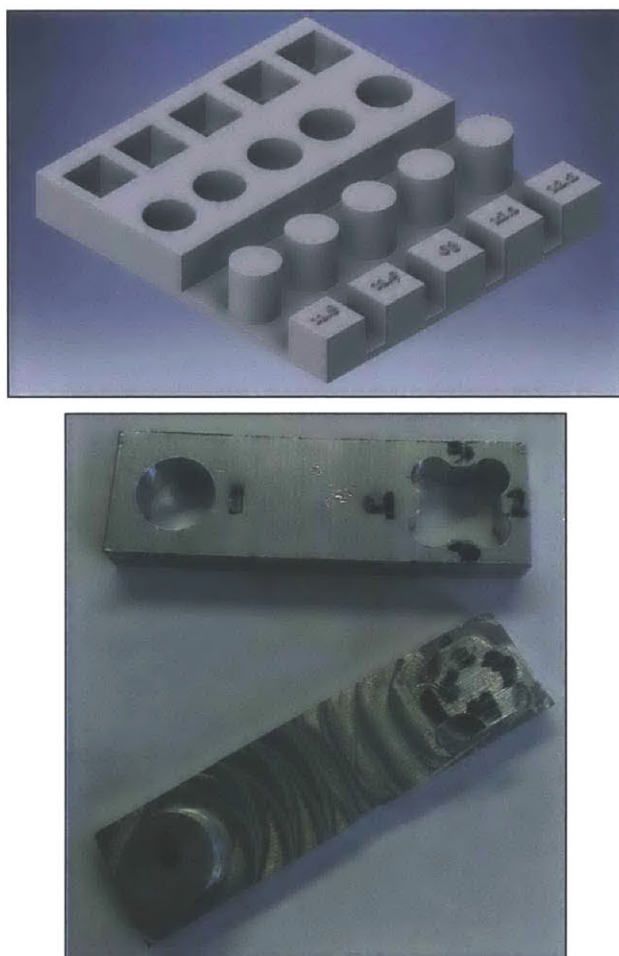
CAD Model of the Delta Test Part and Delta Test Gauges. The cube gauge requires interesting geometry at corners to avoid seams formed during the printing process. Using a coordinate measuring machine (CMM), the female cylinder gauge diameter was 11.983mm with a cylindricity of 0.0348, the female cube gauge had dimensions 12.010mmx12.013mm, the male cylinder gauge had a diameter of 11.901mm, and the male cube gauge had dimensions of 11.984mmx11.973mm.
